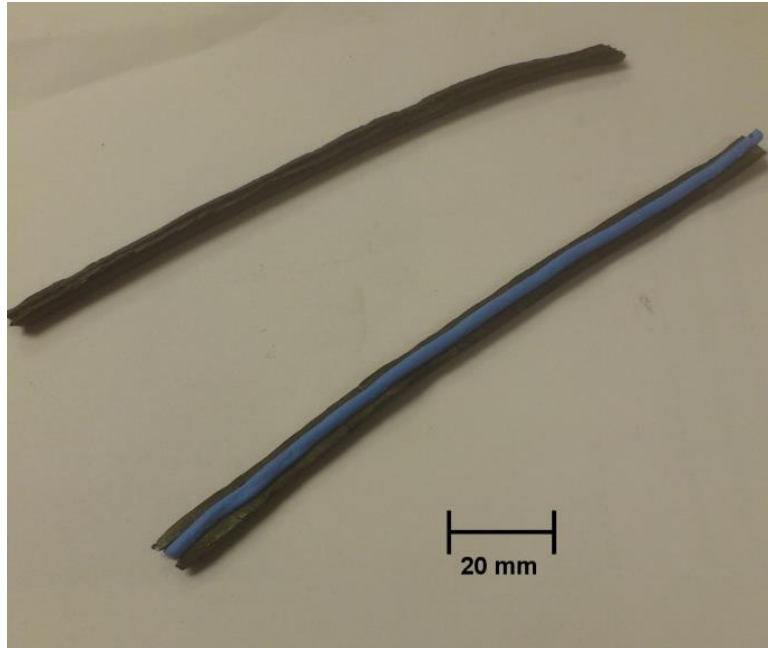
Line strips of hybrid O-rings before they were compression cured to form hybrid O-rings.
